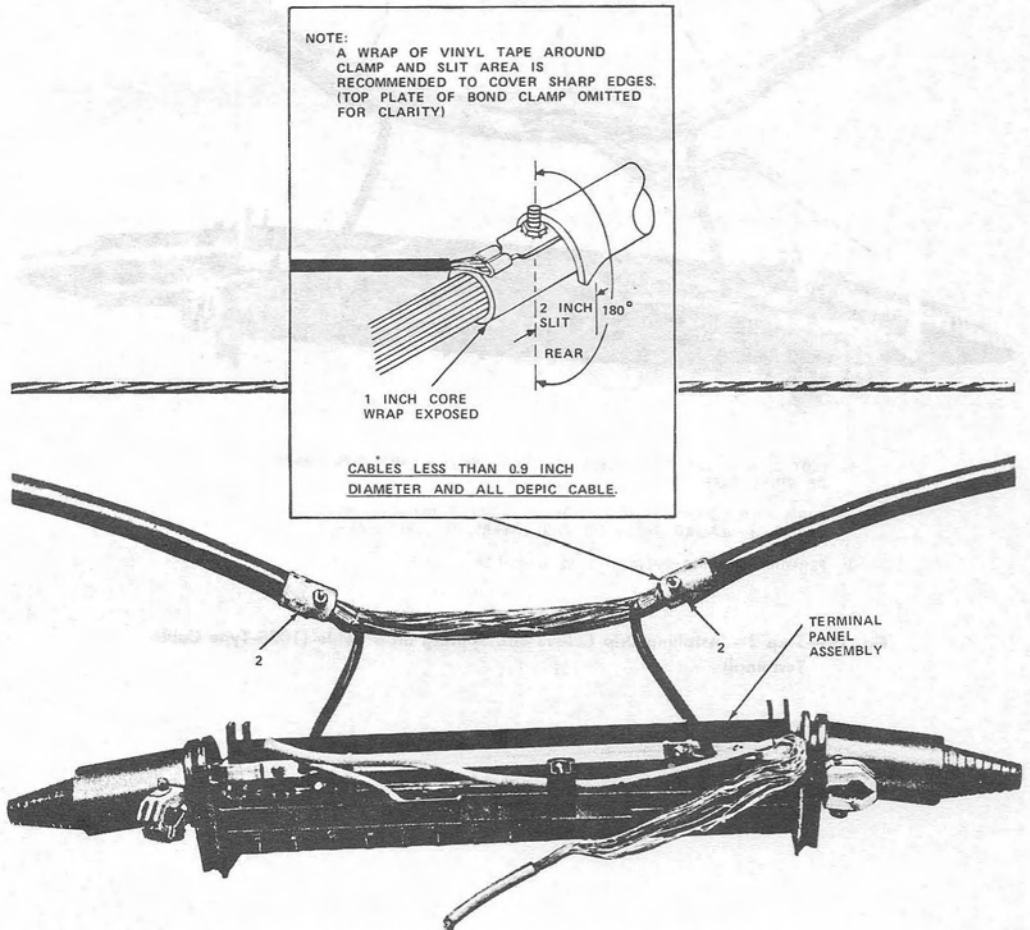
Step 4—Installing Housing Assembly (105A-Type Cable Terminal)
